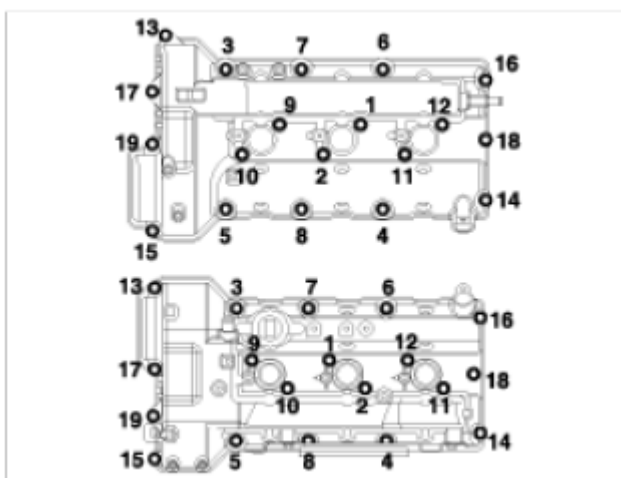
Identifying Cylinder Head Cover Bolts Tightening Sequence
